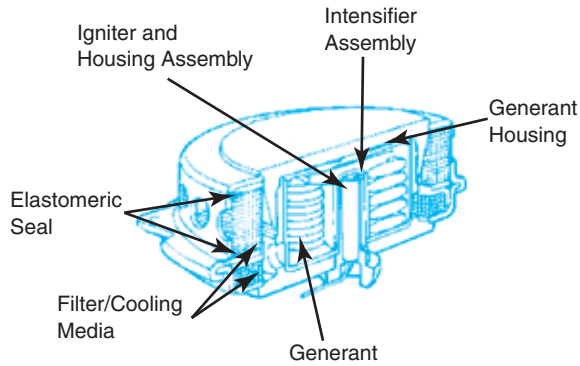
Igniter assembly. (GM Service and Parts Operations)
